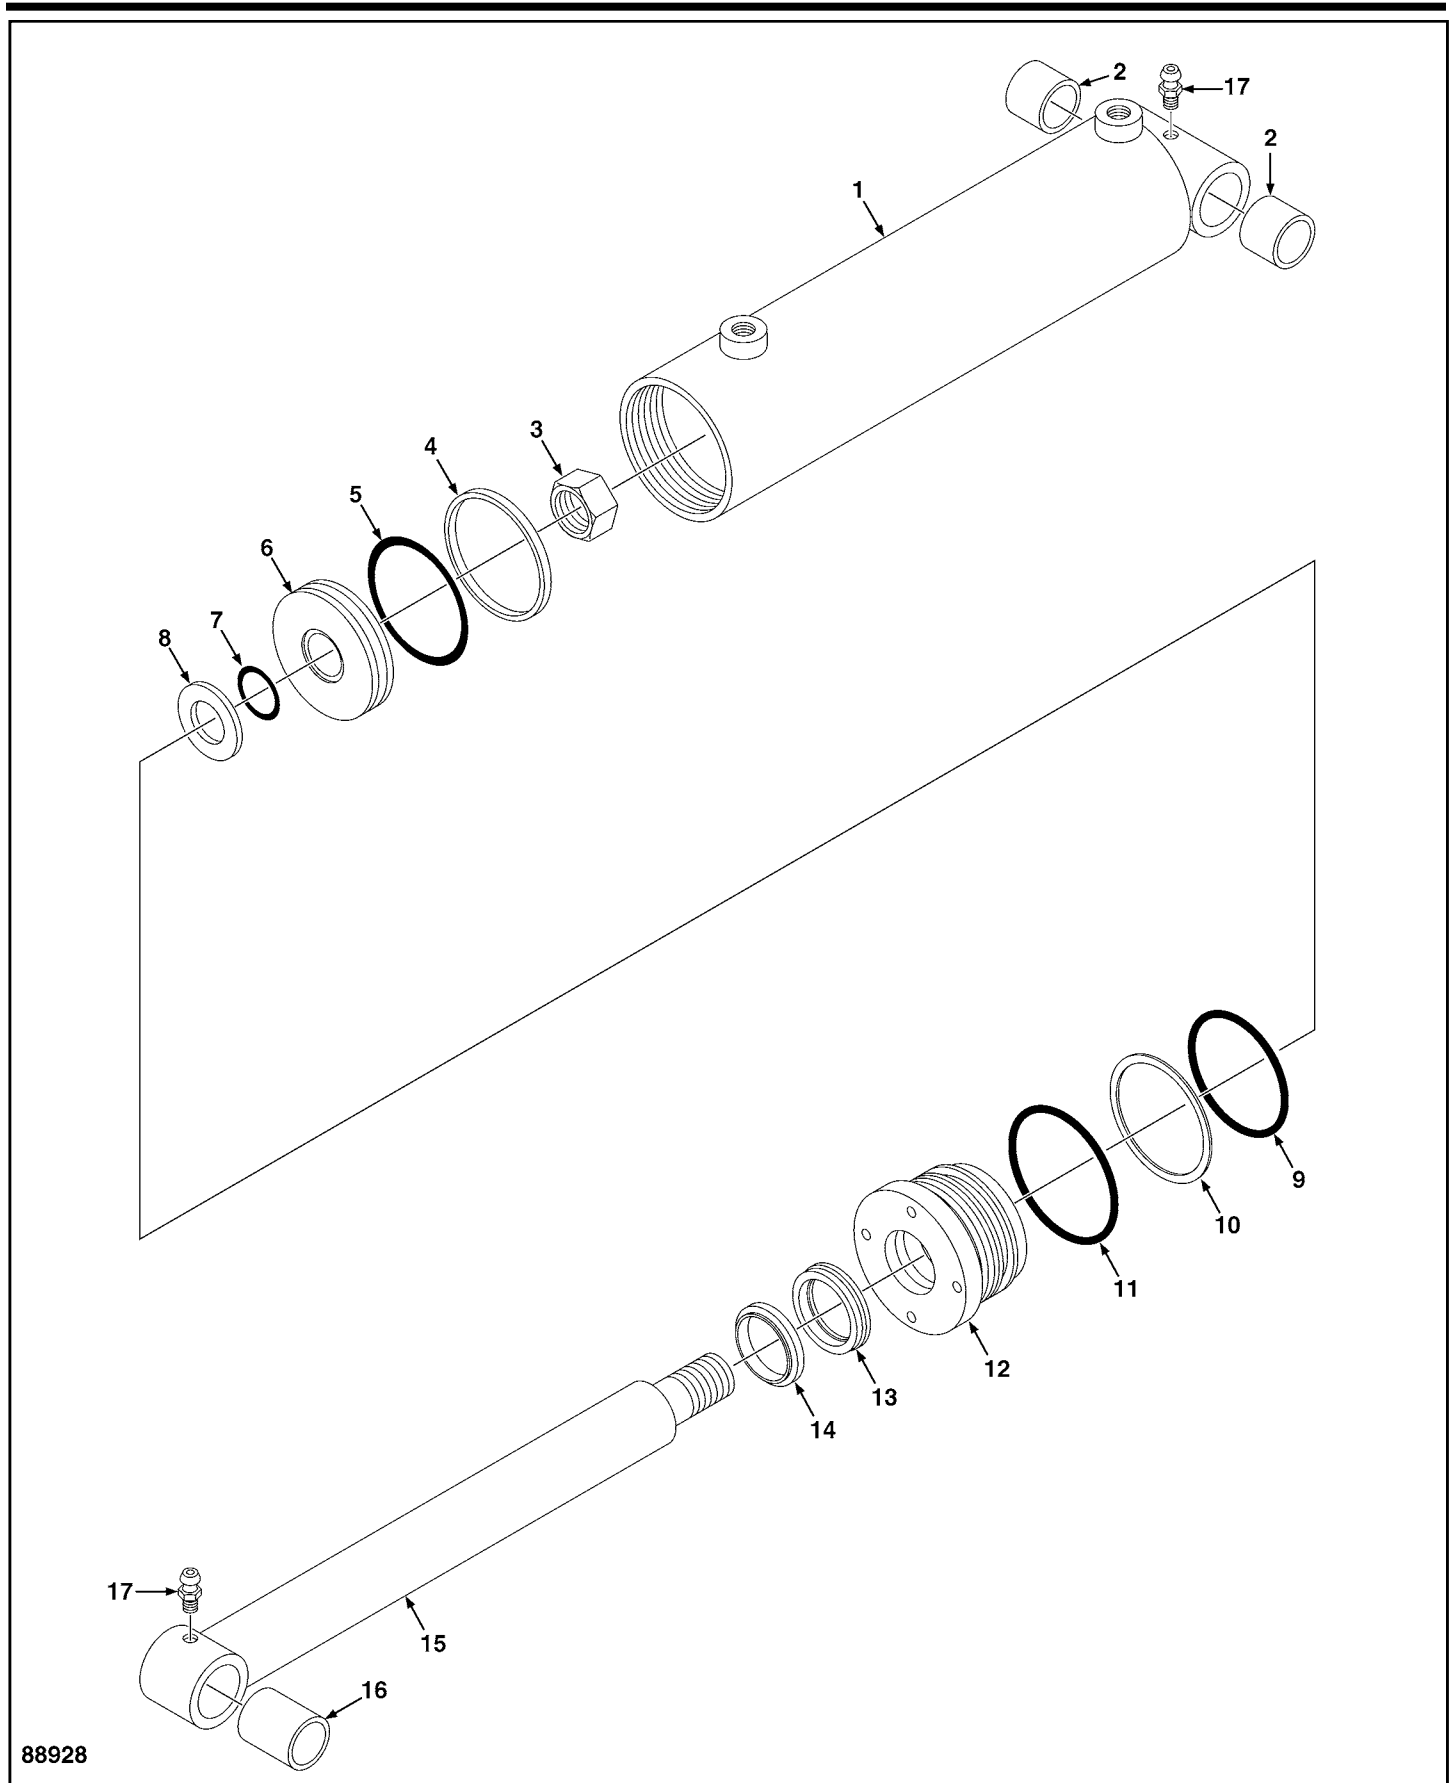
5MP89113, Cylinder Assembly 2-1/2" Bore x 8" Stroke
